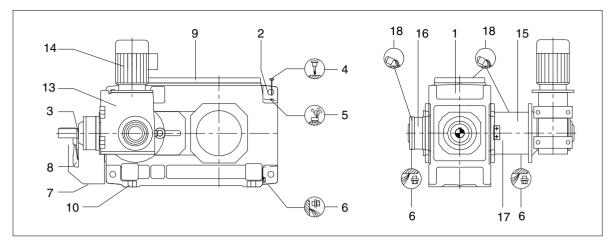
Gear-unit features on gear units types $B3.H/T3.H \le 12$
